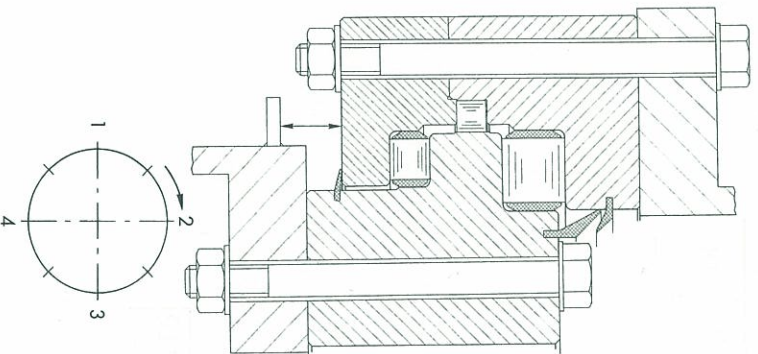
Three-row slewing bearing ring – basic test setup for axial reduction measurement
